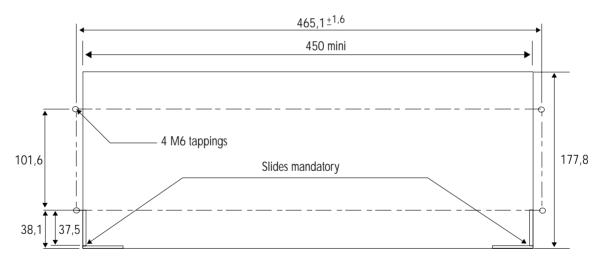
Location of attachment points for cabinet mounting (EPAC 3500)
